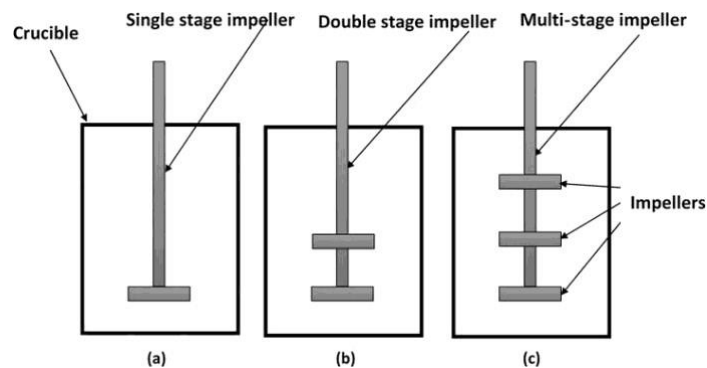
Single stage impeller stirrer, double stage impeller stirrer, multistage impeller stirrer
